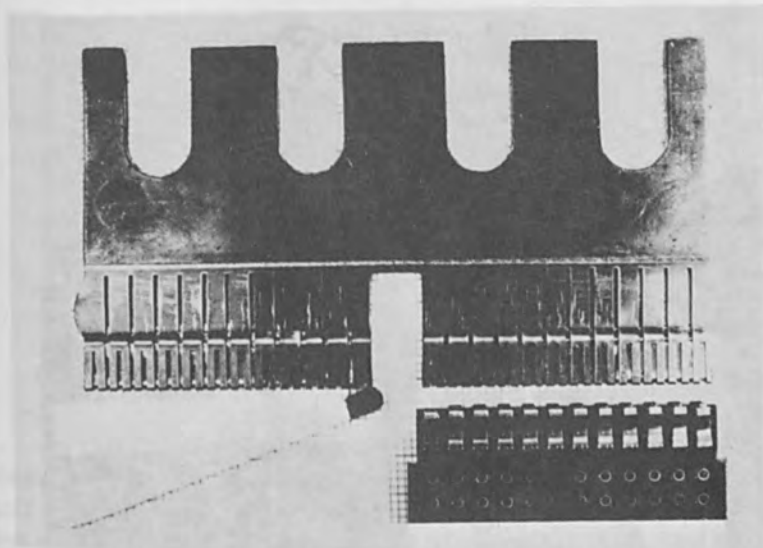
Soldering electrode seam welded by electron beam and a small card to be soldered.
